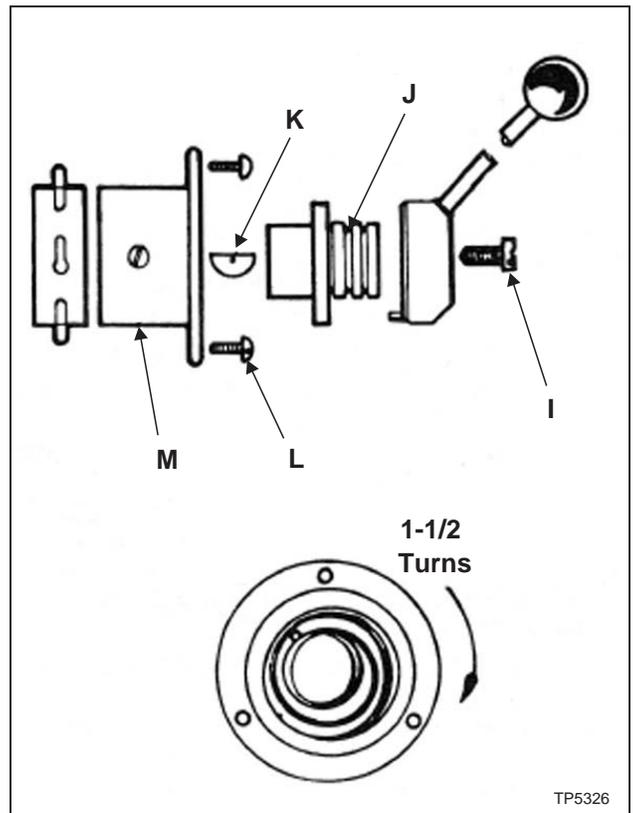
Micro Feed Trip Assembly and Quill Removal
